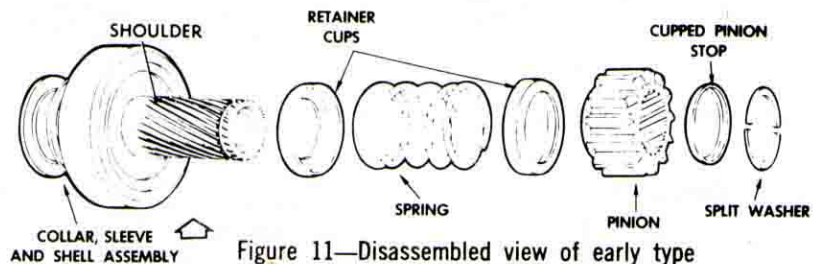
Disassembled view of early type heavy duty sprag clutch drive assembly.
